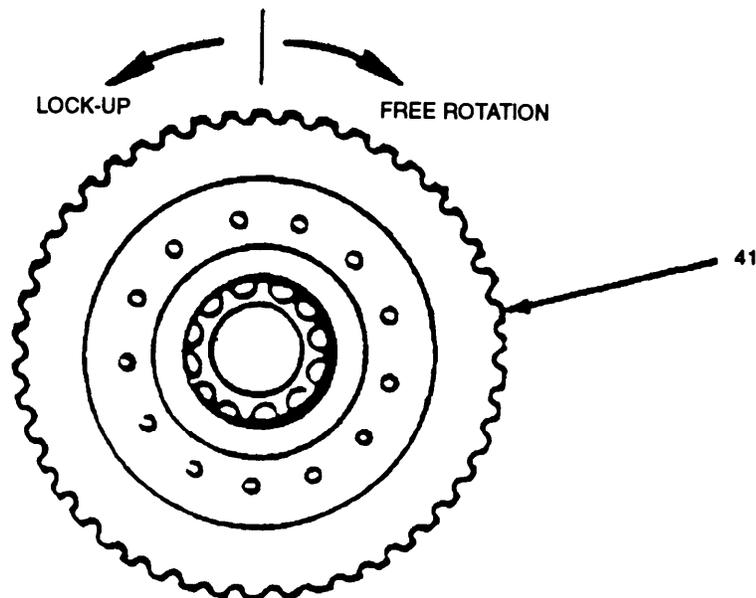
Winch Assembly Model 11-S-EC, Reassembly (Sheet 5 of 10)
